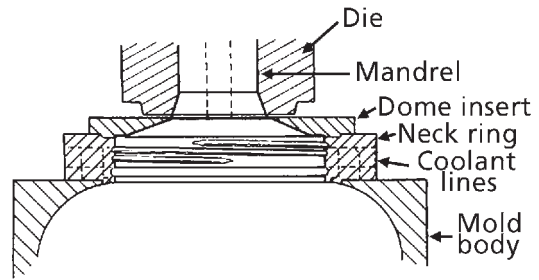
Moulded Dome-Fly cut post-moulded part
